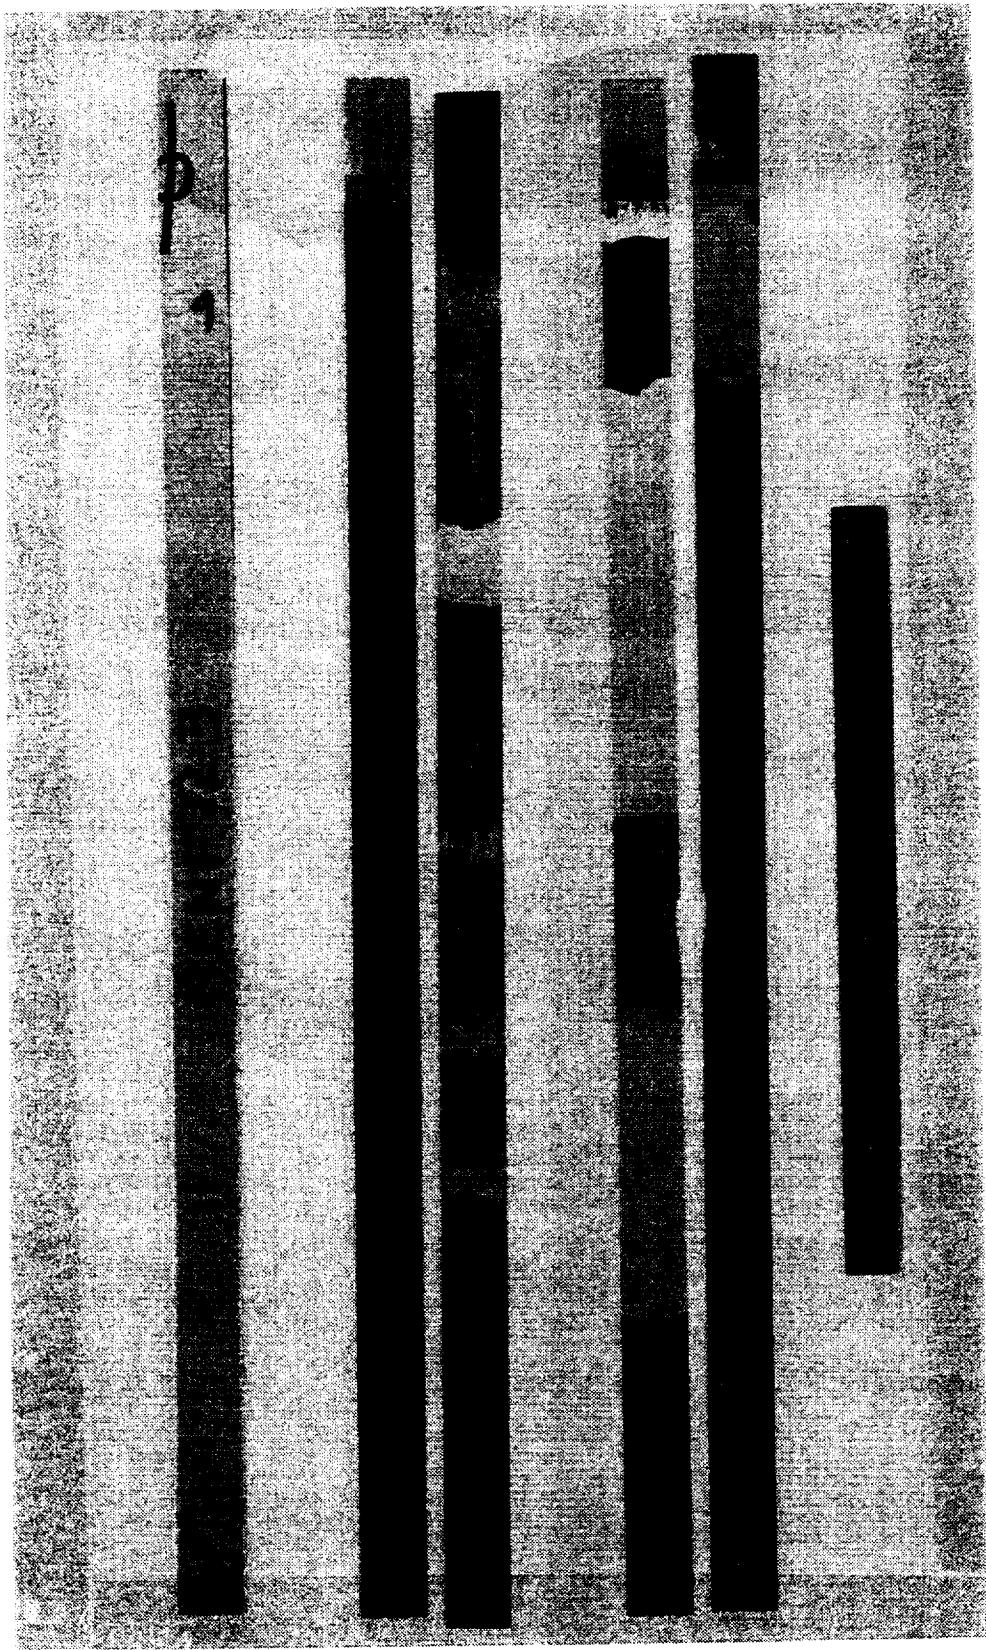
Photograph of Fracture Surfaces of Selected End Notch Flexure Test Specimens, Mode II Loading
